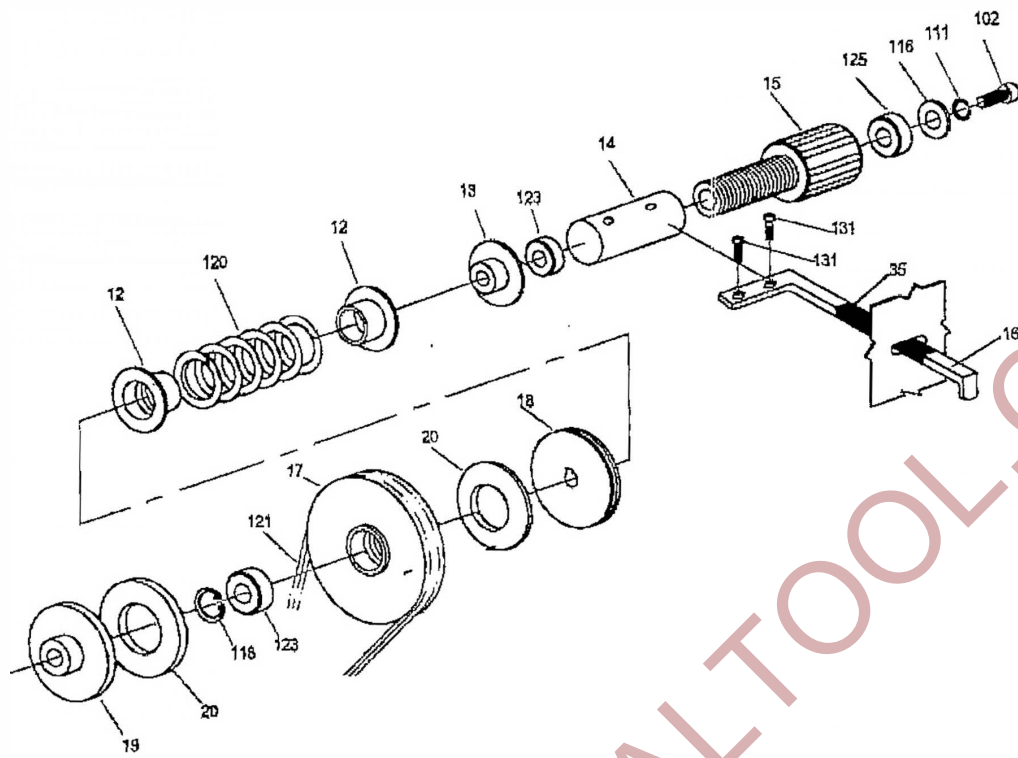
TENSION ADJUSTMENT - MECHANICAL TENSION
